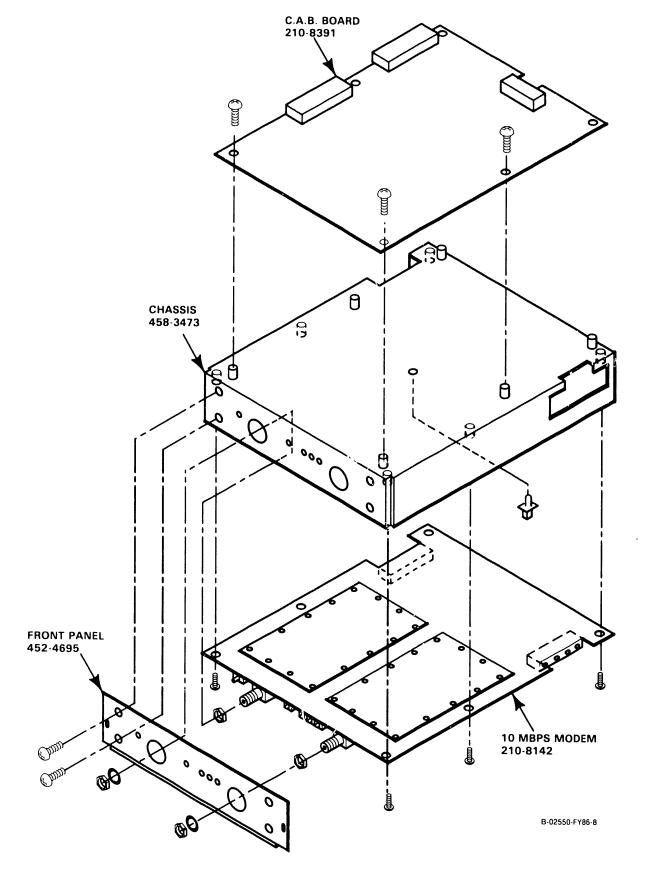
VS-300 CIU C.A.B./Modem Back Panel Assembly
